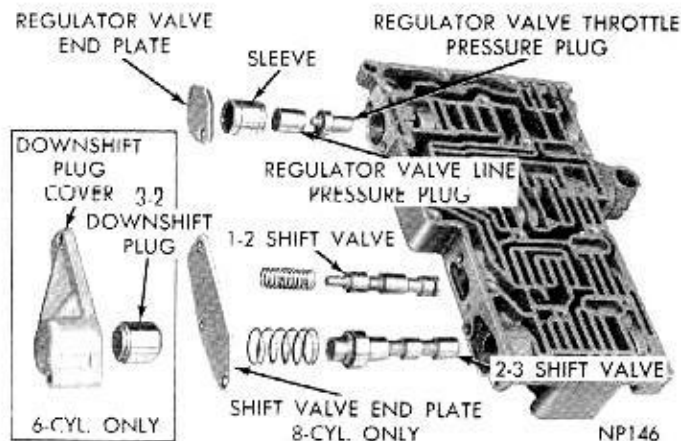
Valve Body—Shift Valve Side—Disassembled
